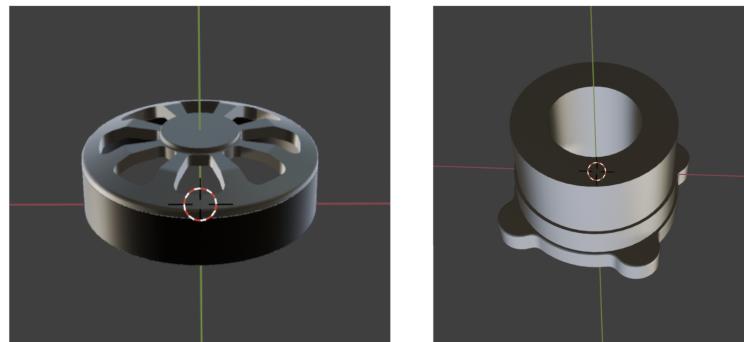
CAD Model of the Motor (Left) and the Motor Mount (Right)
